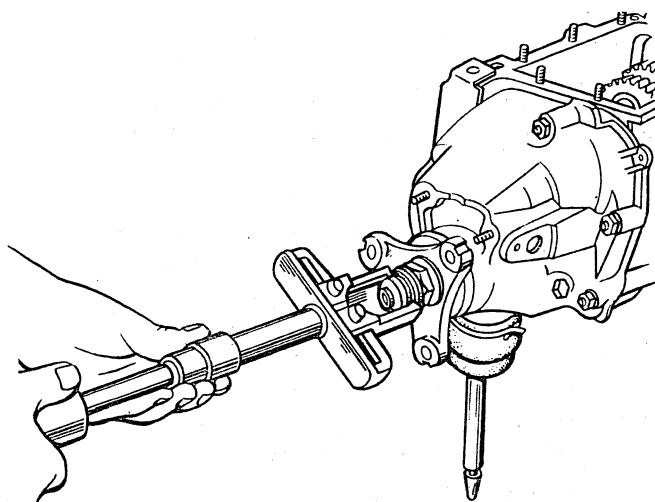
Removing the Aligning Ring of Propeller Shaft Flexible Coupling with Remover Tools A.40006/1 and A.40005/4
